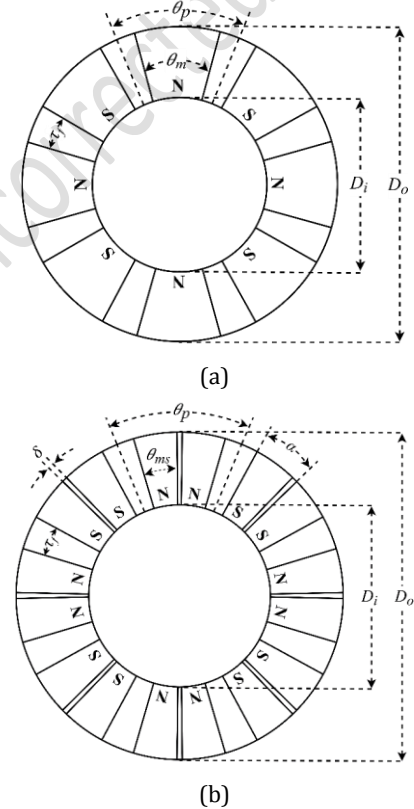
Rotor design (a) initial design (b) improved design with magnet segmentation.
